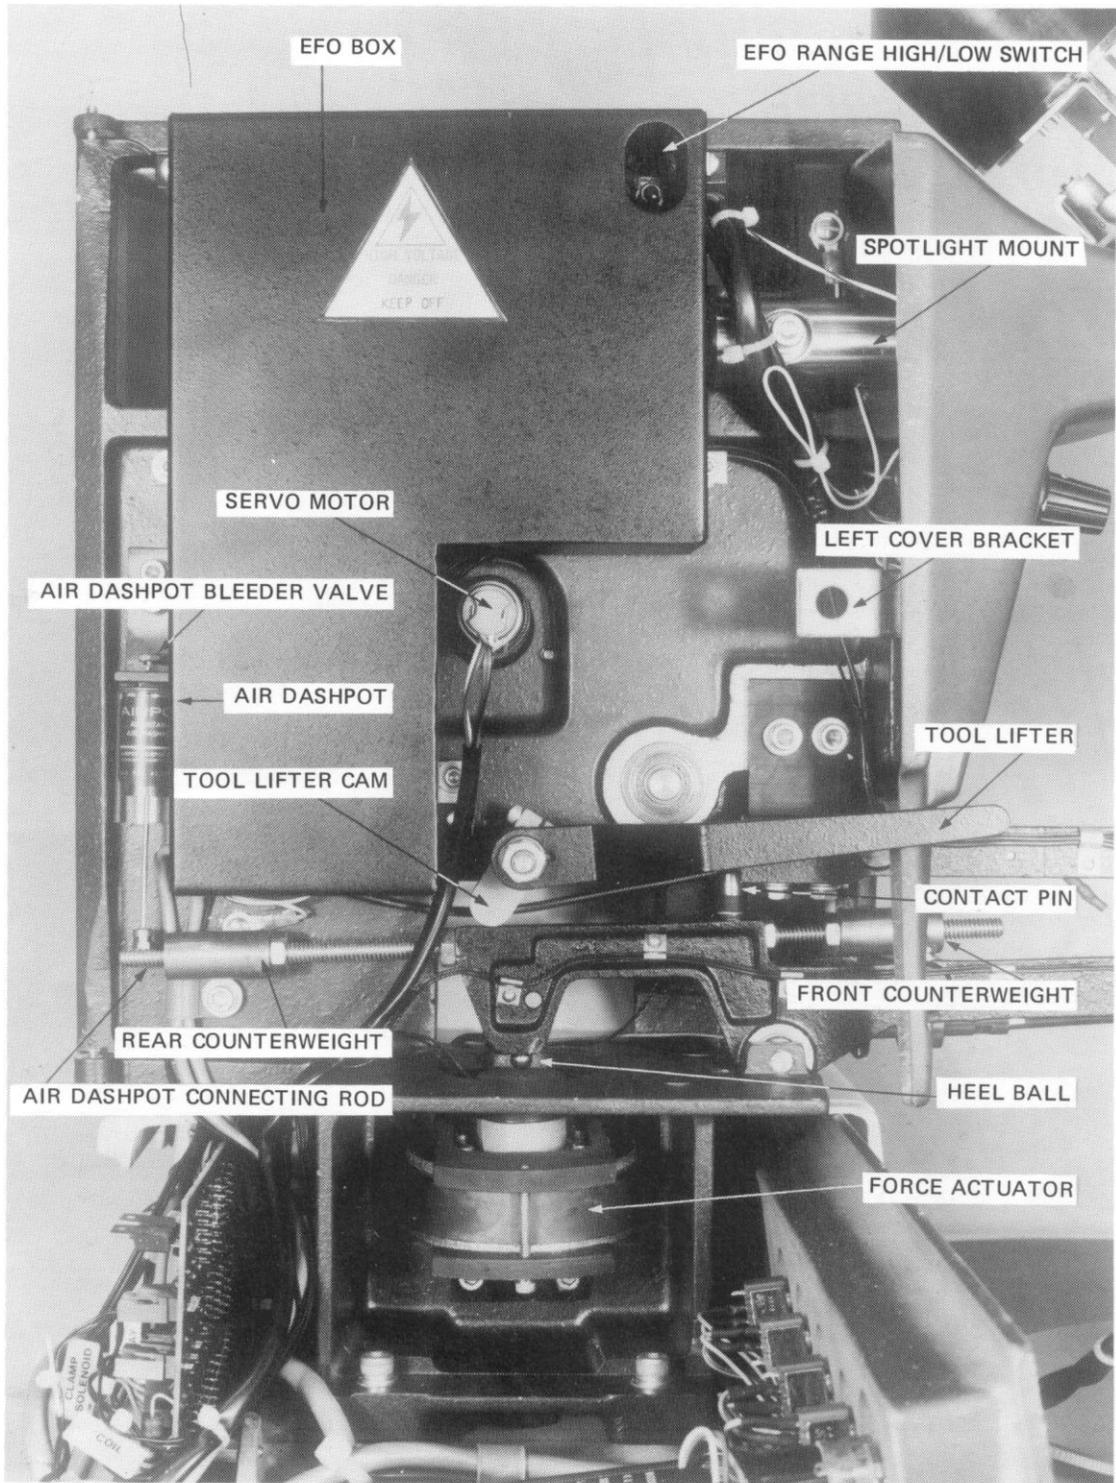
MAIN HEAD - INNER LEFT SIDE
